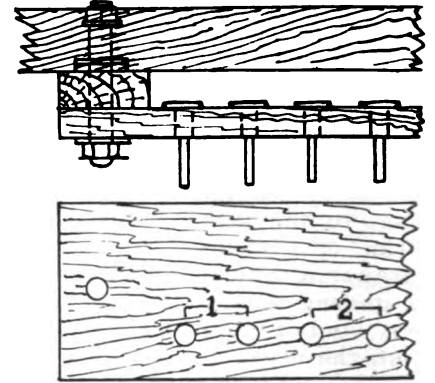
A HANDY VALVE HOLDER THAT FACILITATES MOTOR ASSEMBLY
